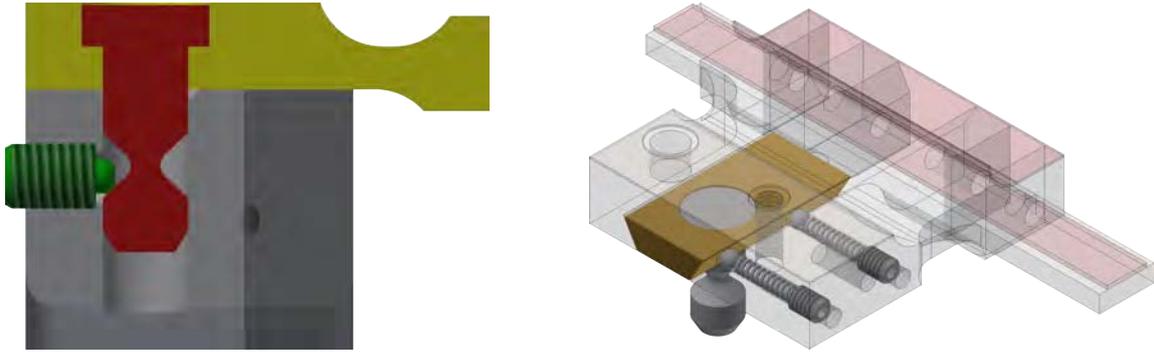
Left: cross section of the BWD ladder mount mechanism: end-mount (yellow) and “Kokeshi” pin (red) belong to the ladder, while end-ring (grey) and set screw (green) are support parts. The embedded cooling channel between the two diffusion-welded parts of the end-ring is clearly visible. Right: on the FWD side, a spring-loaded sliding mechanism allows relative motion along the beam axis (z) while maintaining a thermal contact.
